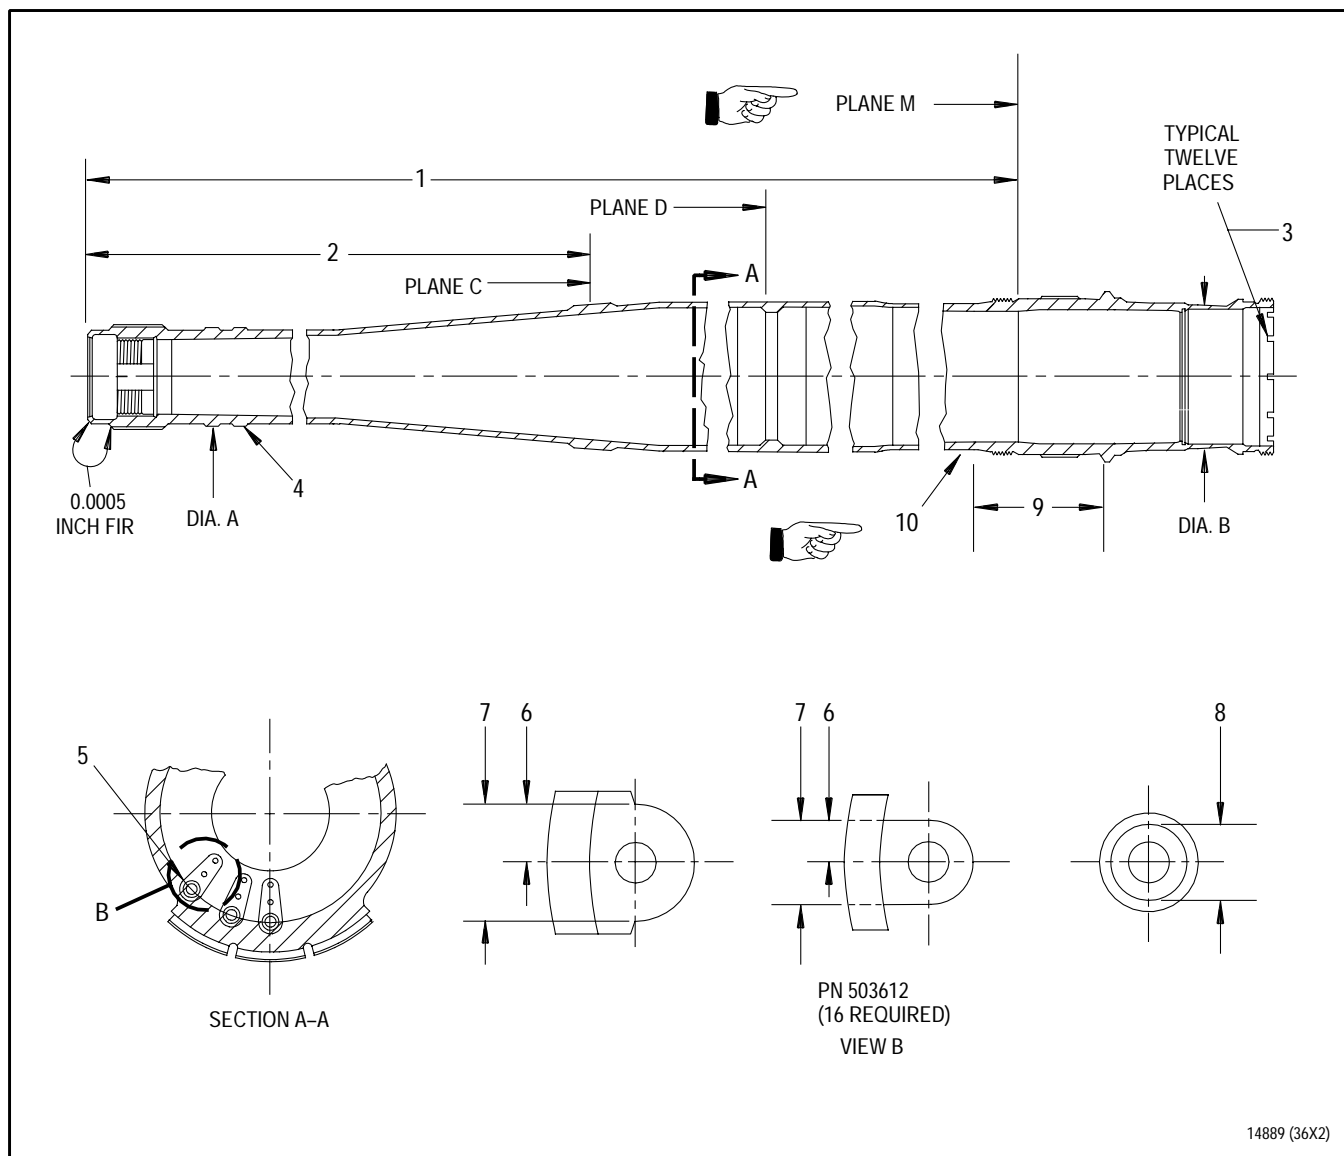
Front Compressor Drive Turbine Shaft Assembly - Dynamic Balance
